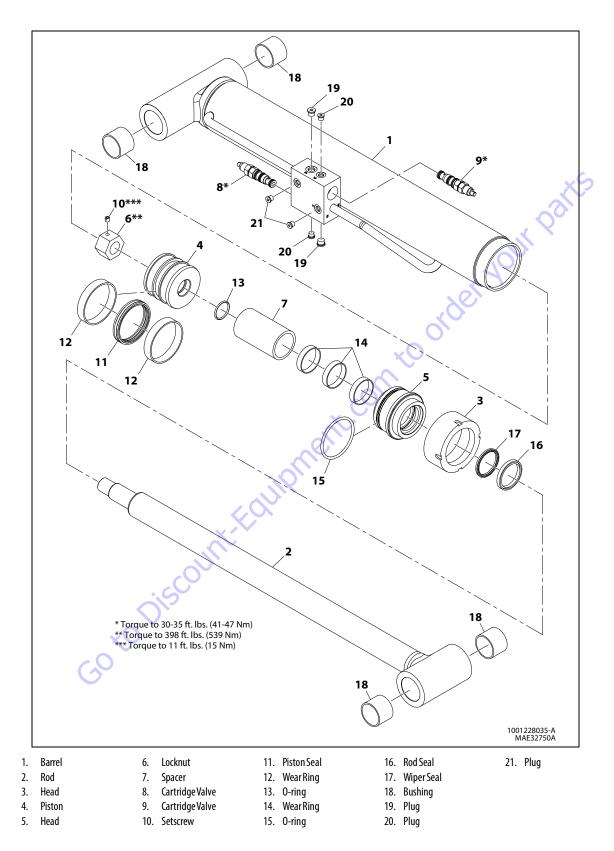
Lower Lift Cylinder - USA Built Machine
